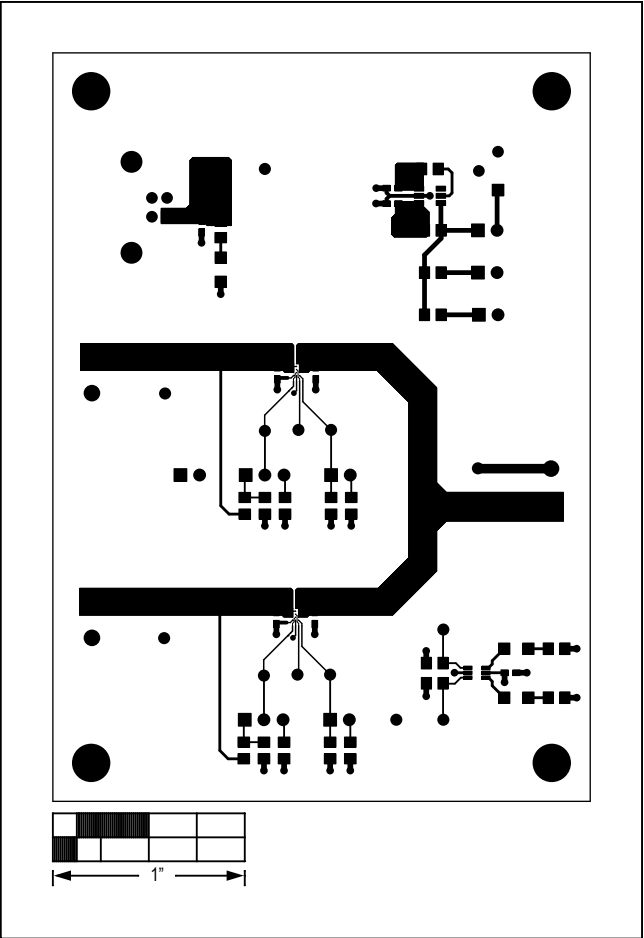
MAX14670 EV Kit PCB Layout—Component Side
